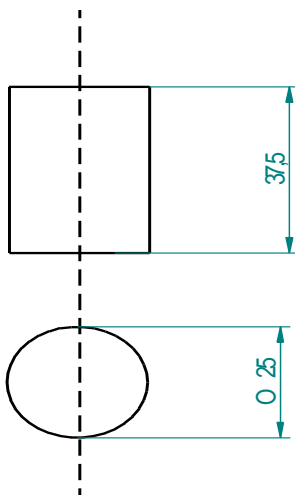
Schematic representation of compressive specimen as per ASTM standard E 9
